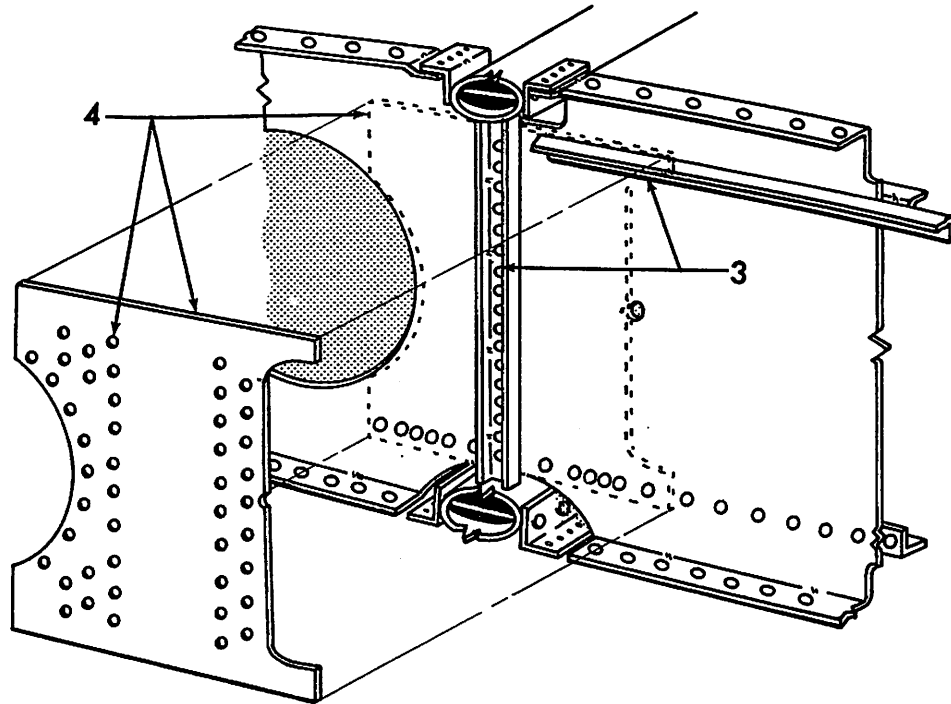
A. Outer Wing Panel Front Spar Replacement (Sheet 1 of 6 Sheets)
